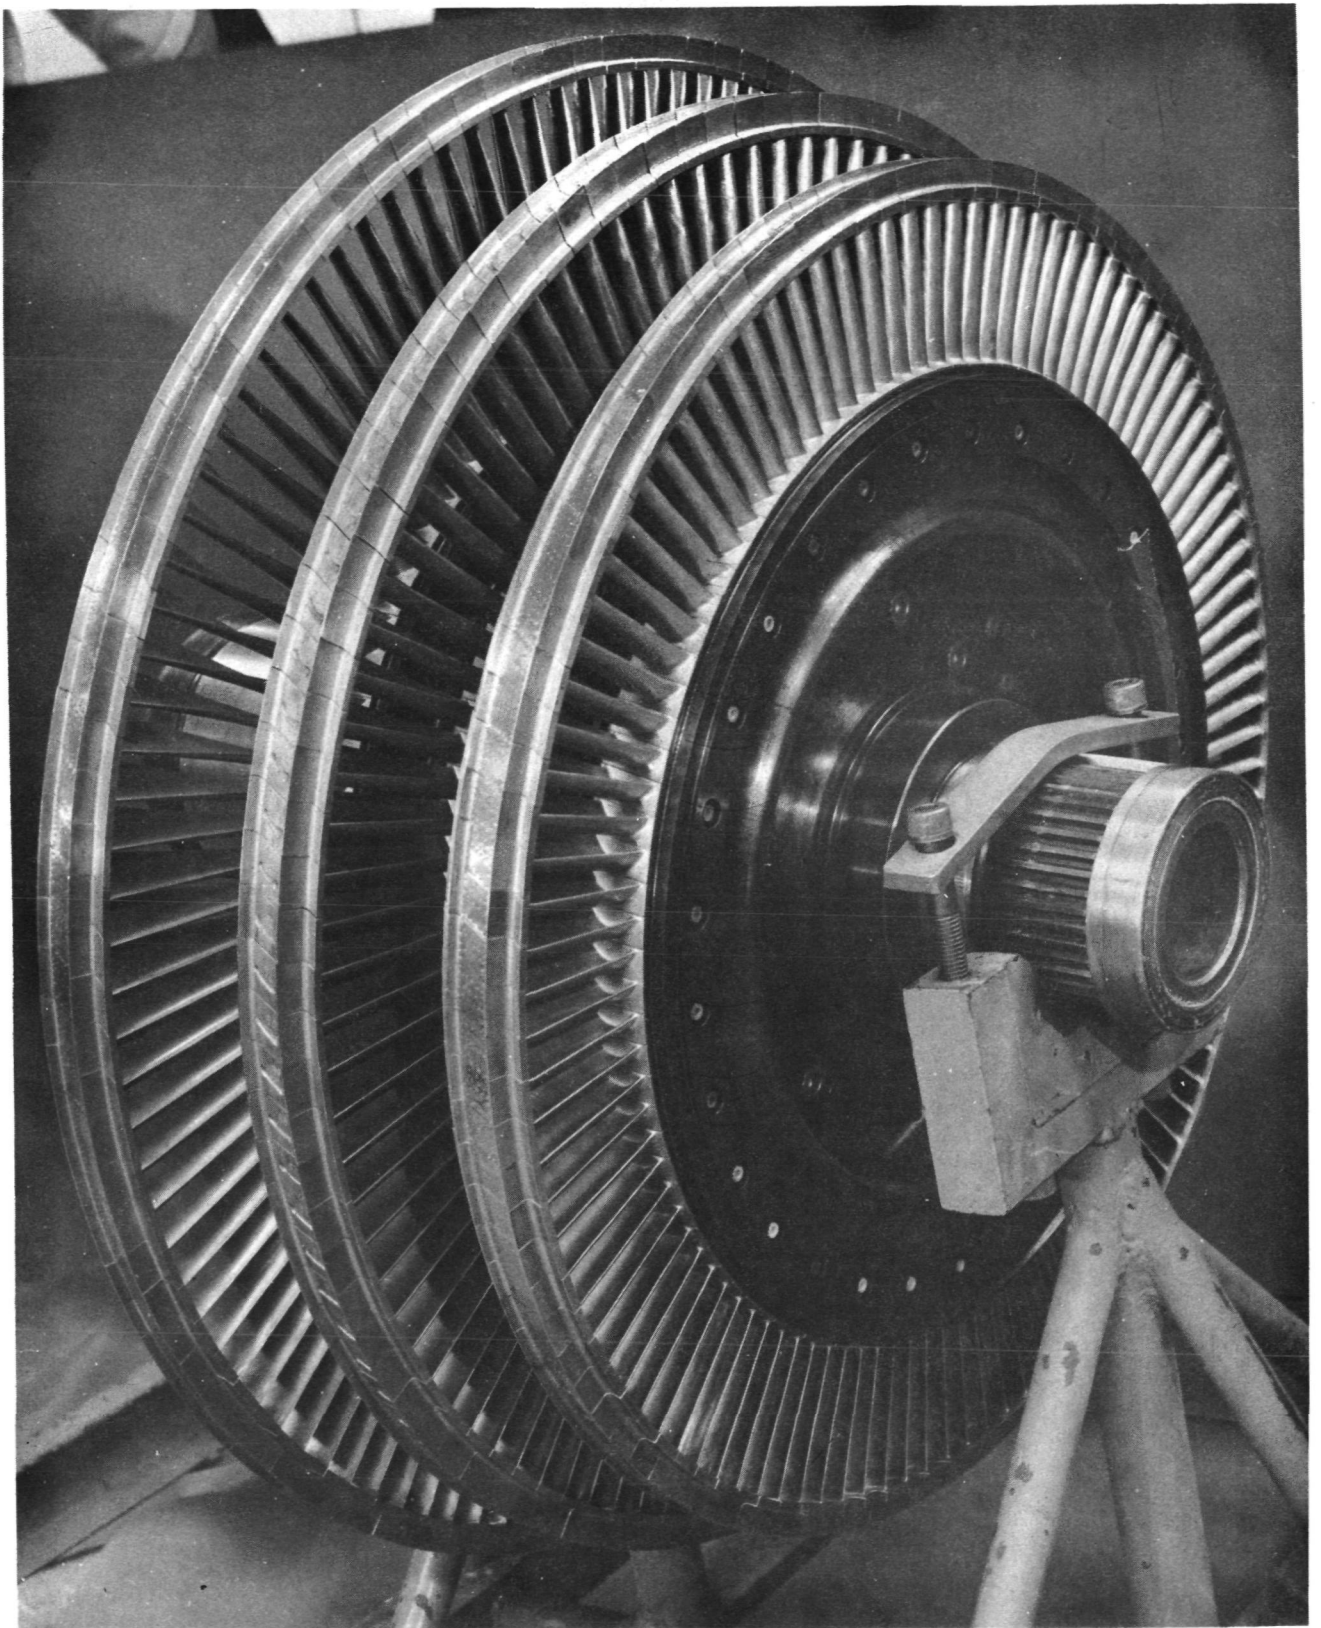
Three-Stage Turbine Plain Blade Rotor Assembled.
